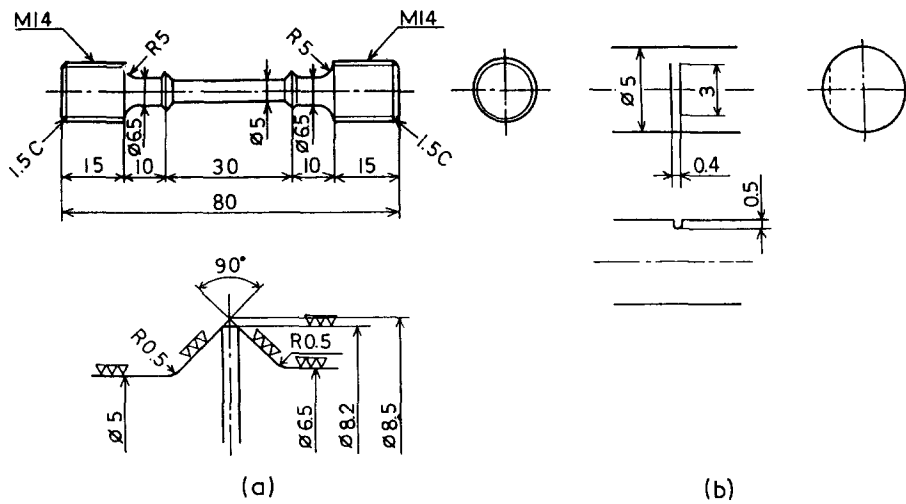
Configurations of specimens for (a) creep and creep rupture tests and (b) surface crack propagation experiments. Dimensions in millimetres.
